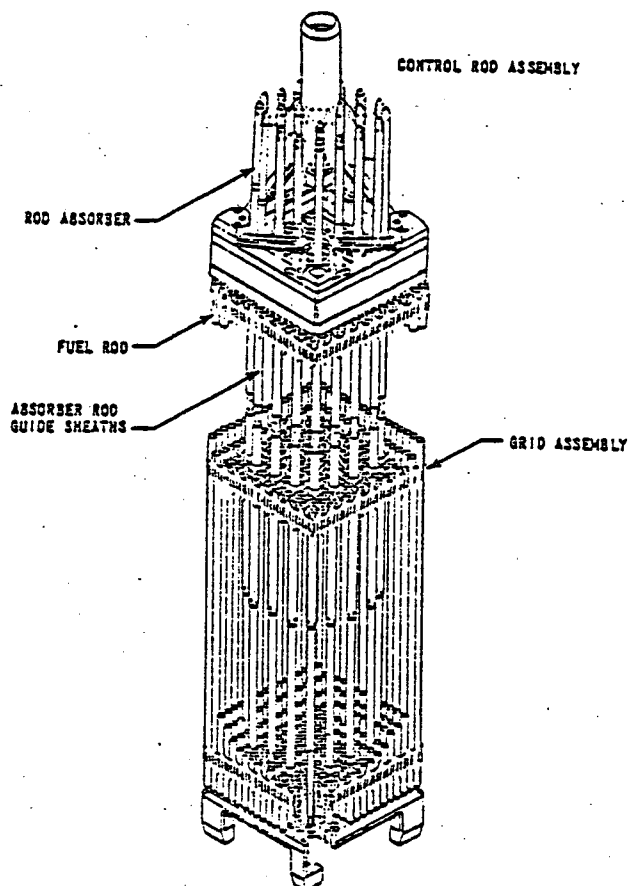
Diagram of typical PWR fuel assembly section from Ref.5 showing position of control elements.
